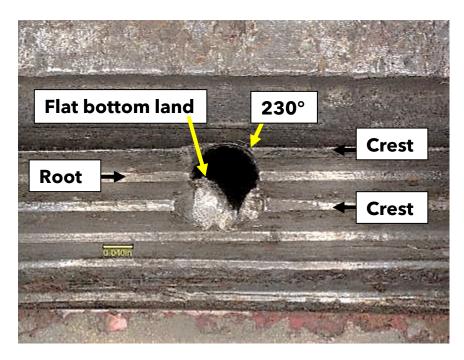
Side view of the clamp nut showing a radial-oriented drilled through-hole in the outer threads, at approximately 230 degrees; after cleaning the threads with a cotton swab soaked with acetone.
